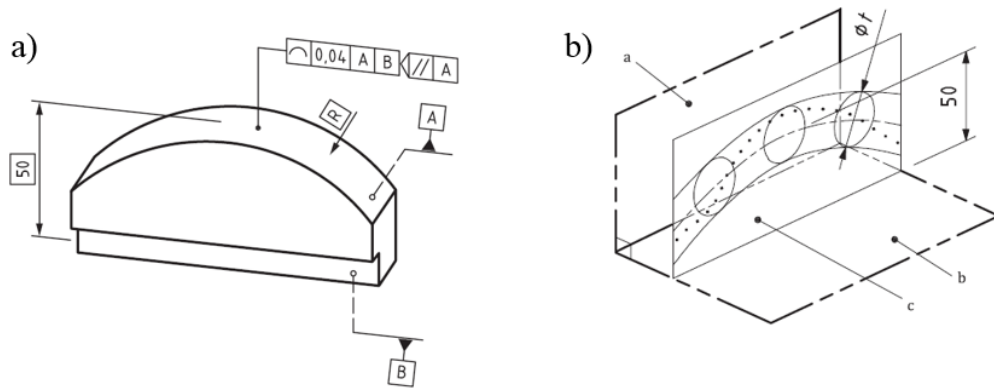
Line profile tolerance: a) 3D perspective technical drawing; b) Definition of the line profile tolerance zone. Key a: datum A, b: datum B, c: plane parallel to datum A [1]
